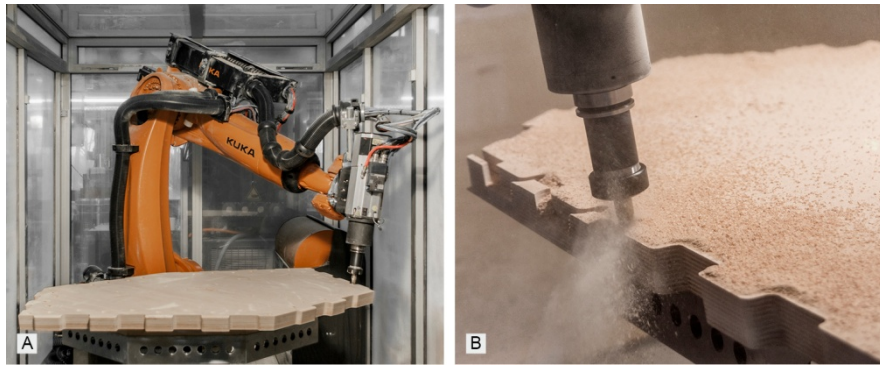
A: Robotic fabrication setup for milling a plywood plate. B: Close-up of the milling process.
